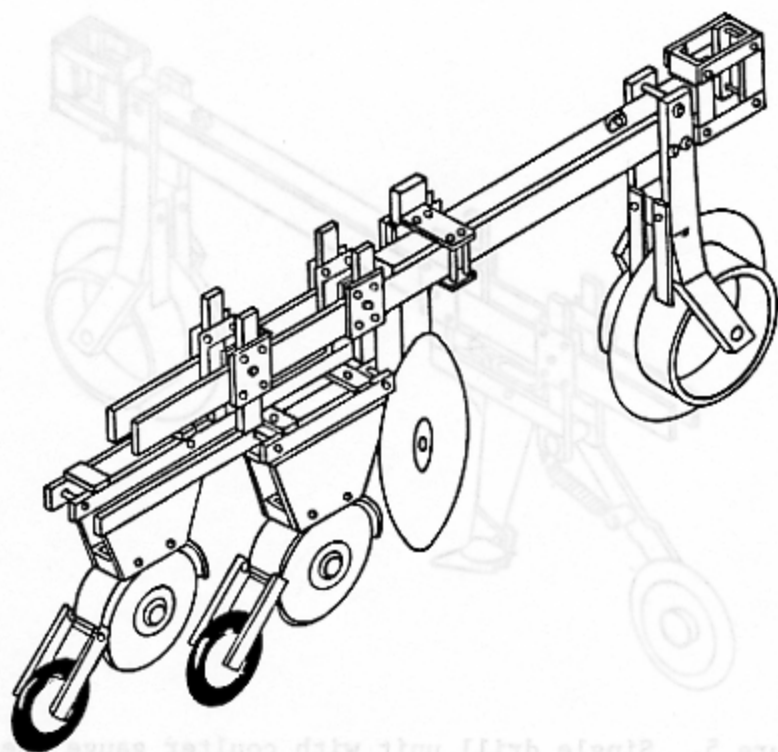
Single drill unit with coulter gauge wheel 56 cm diameter concave disc to remove atrazine treated soil, paired double disc openers, and 2.5 by 25.0 cm press wheels.
